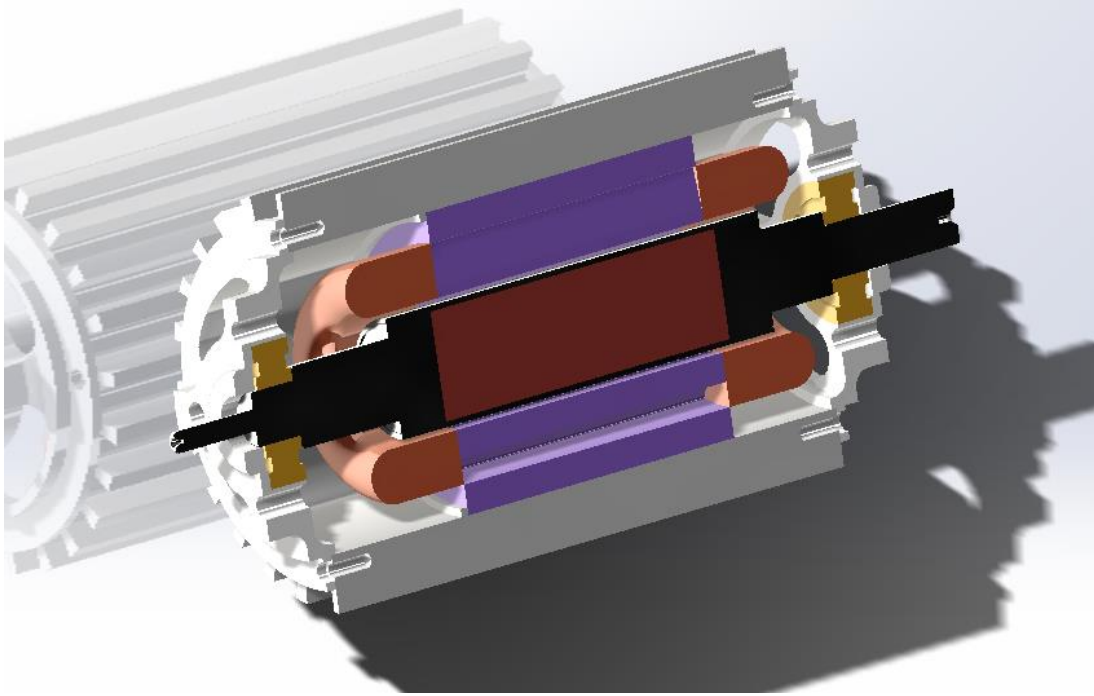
Screenshot of the CAD model of the Arnold motor, cross-sectional view.
